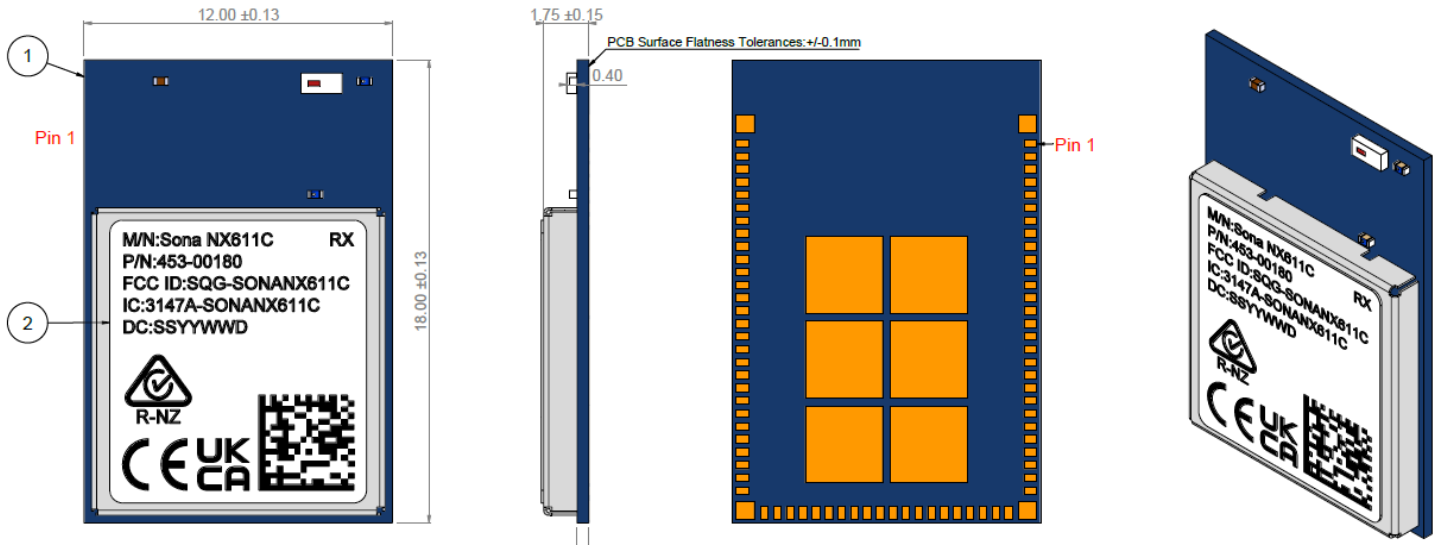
Sona 1218 Chip Antenna Module Dimensions
